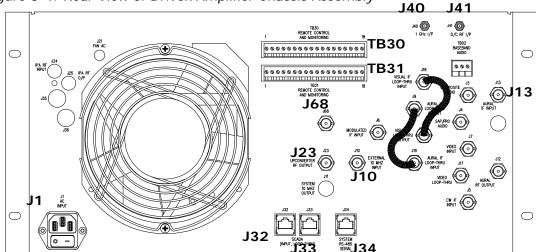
Rear View of Driver/Amplifier Chassis Assembly
